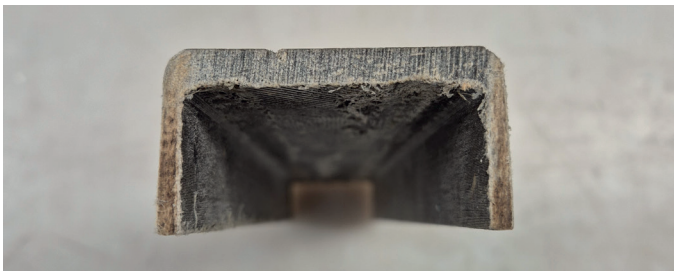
Cross-section of exterior cap for façade model (own image)
